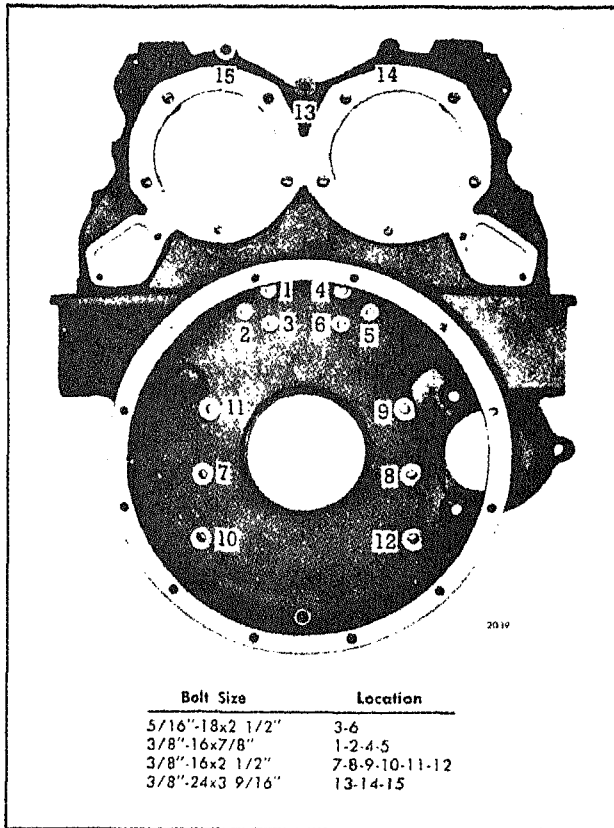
Flywheel Housing Bolt Sizes and Tightening Sequence (Operation 1)--In-Line Engine
